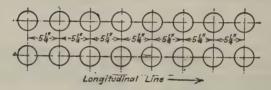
EXAMPLE OF TUBE SPACING WITH PITCH OF HOLES EQUAL IN EVERY ROW
